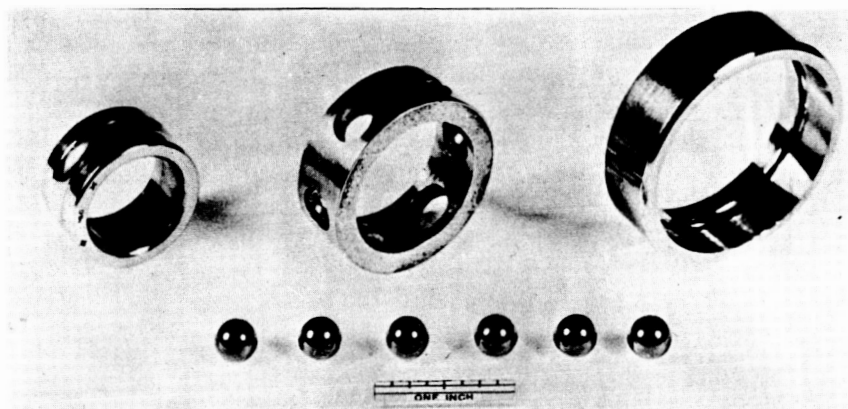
Ball bearing retainers of filled Teflon TFE resin.
